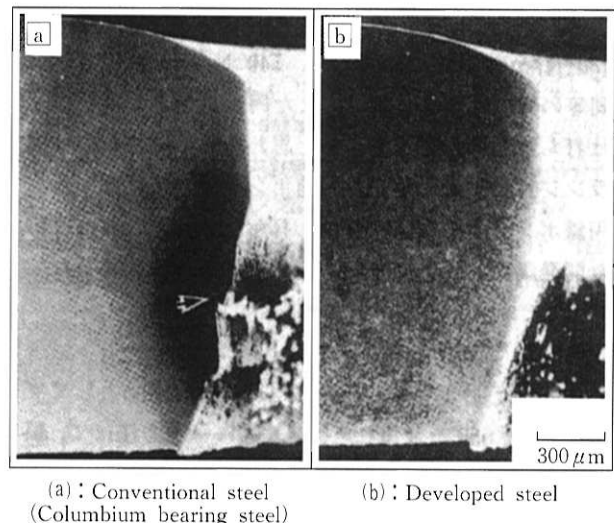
Appearance of sheared edge after punching of developed steel and conventional columbium bearing steel
